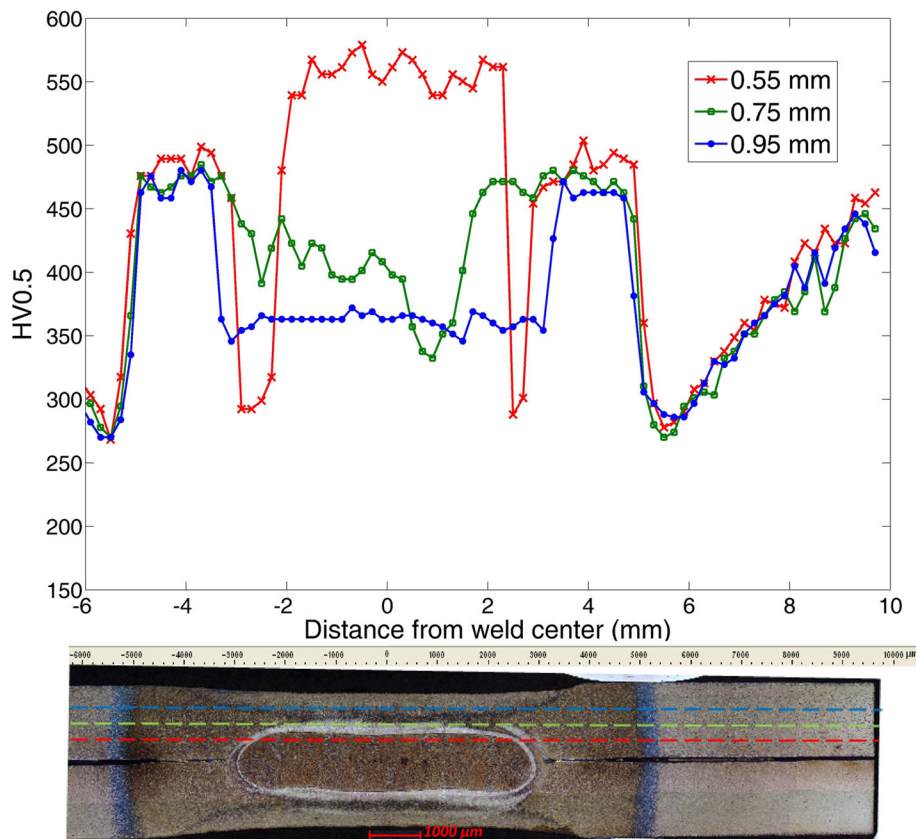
Hardness measurements of adaptively controlled boron steel weld (top) with scaled cross section (bottom) (Color figure online).
